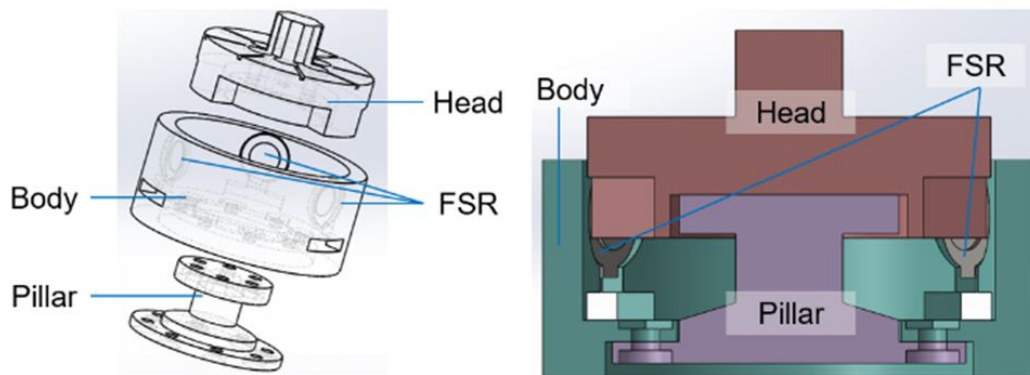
Exploded view (left) and sectional view (right) of the proposed bi-axial pressure sensor
